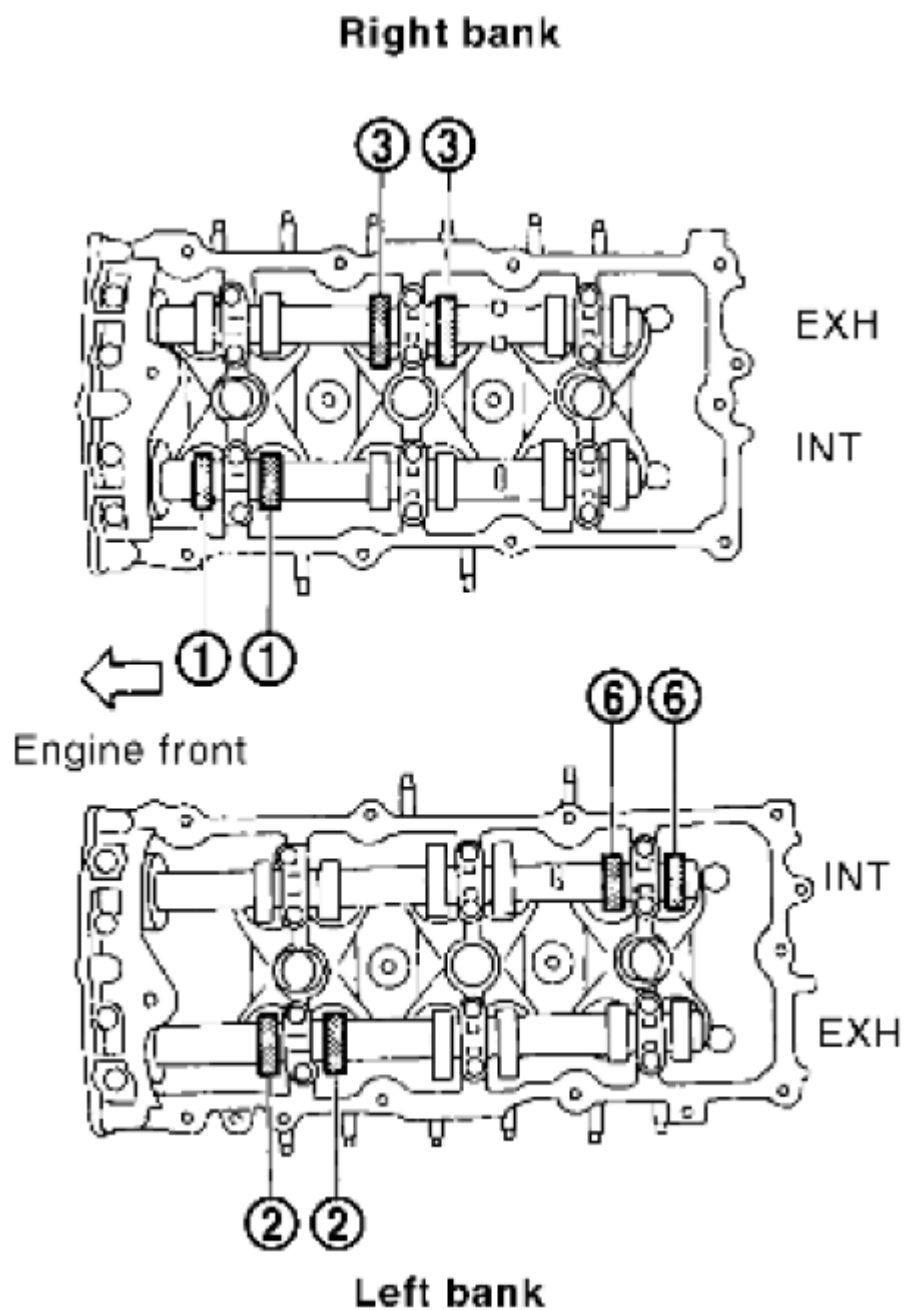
Measuring Clearance Between Valve Lifter And Camshaft
